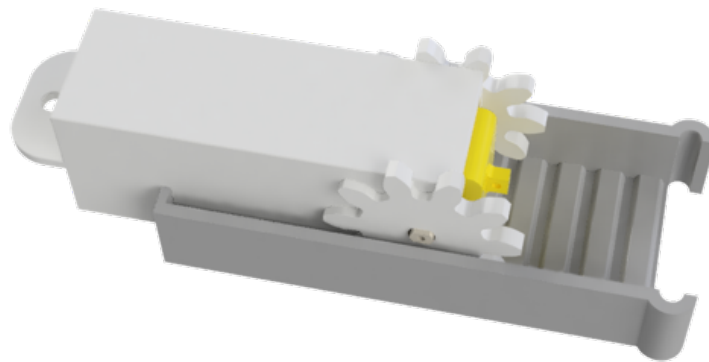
Section view render of the rack and pinion driven telescopic boom, providing horizontal movement for the Cartesian manipulator concept.
